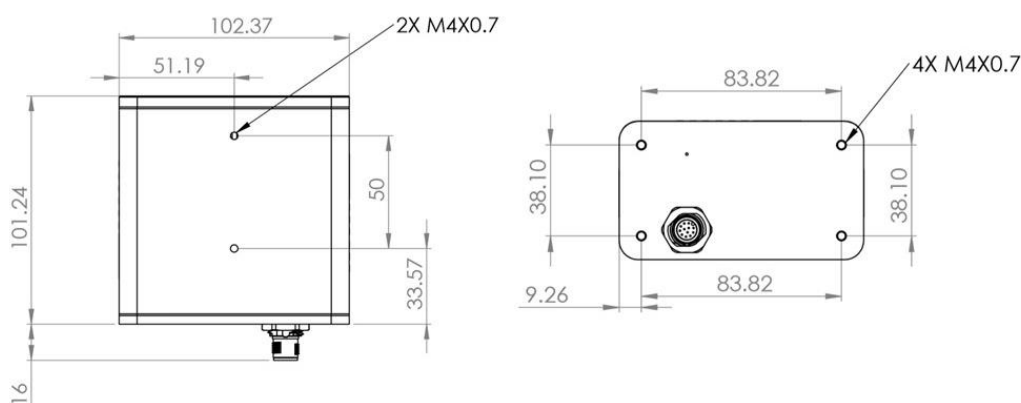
Example of Vista-P60 mounting drawing of the sensor.
